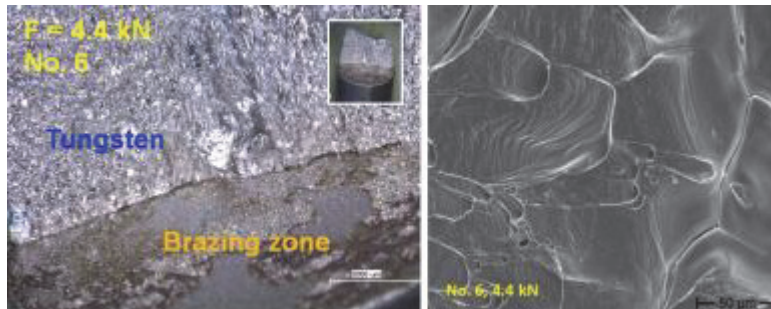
Cracking zone of failed W joint at 4.4 kN with detailed view of the grains of the filler.
